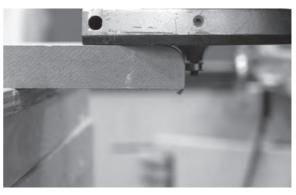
Apply a bull-nosed edge to a scrap piece of 25 mm MDF for the purpose of checking the housing produced by the newly made router jig.
